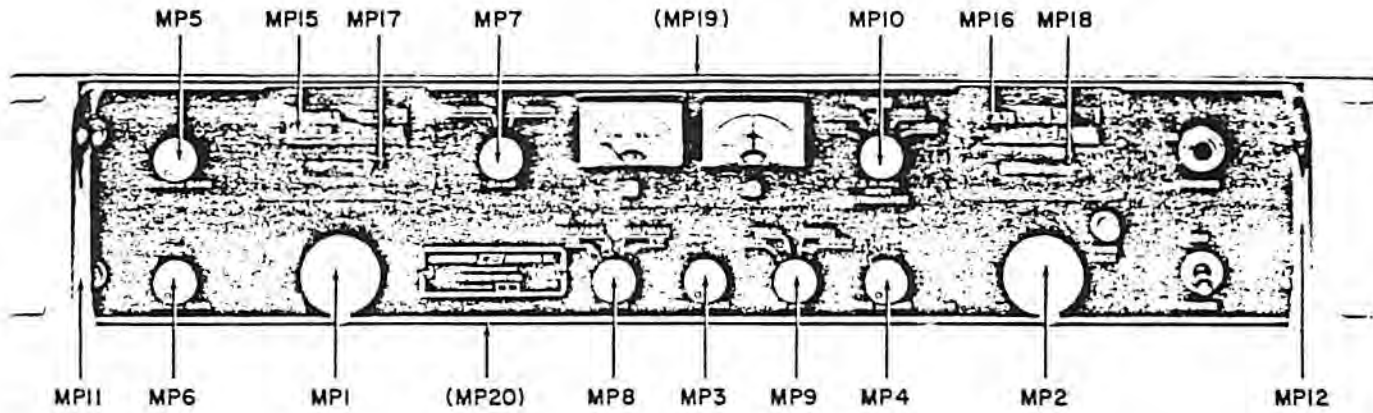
Location of Mechanical Parts, Type 373A Receiver, Front Panel
